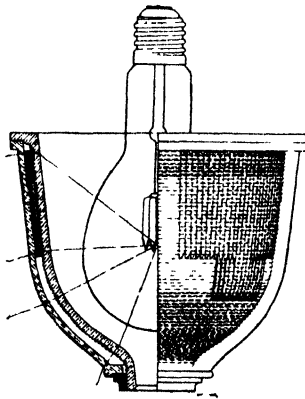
Part Section showing Refractor Assembly and Action of Horizontal Prisms.
